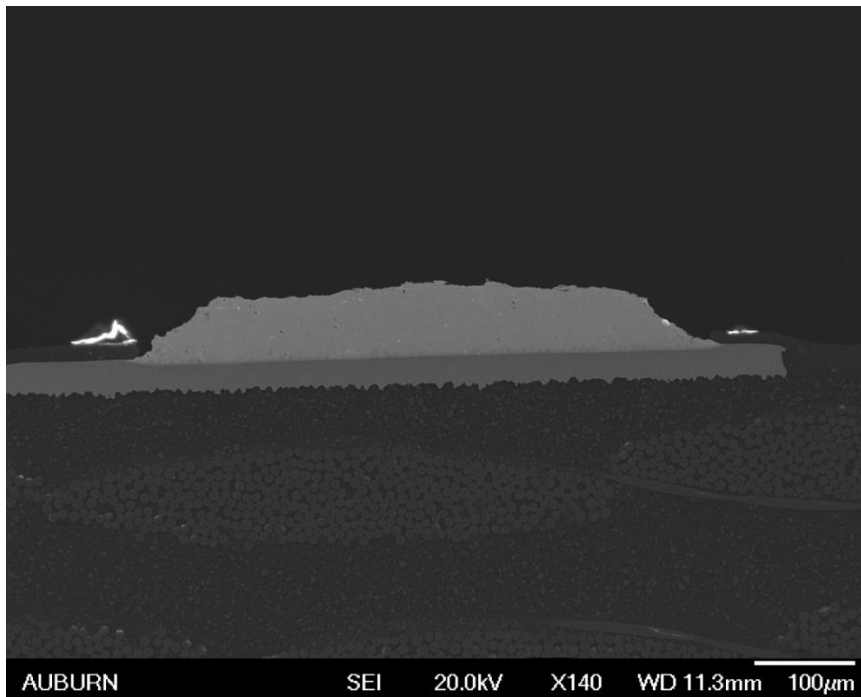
Cross-section view of failed Sn-Ag solder alloy with OSP surface finish
